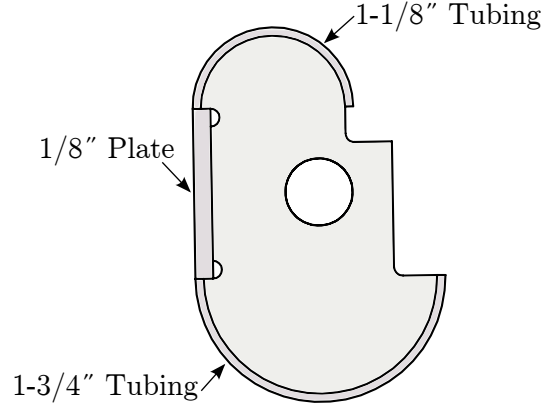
Rigid assembly that forms the vocal fold geometry.
